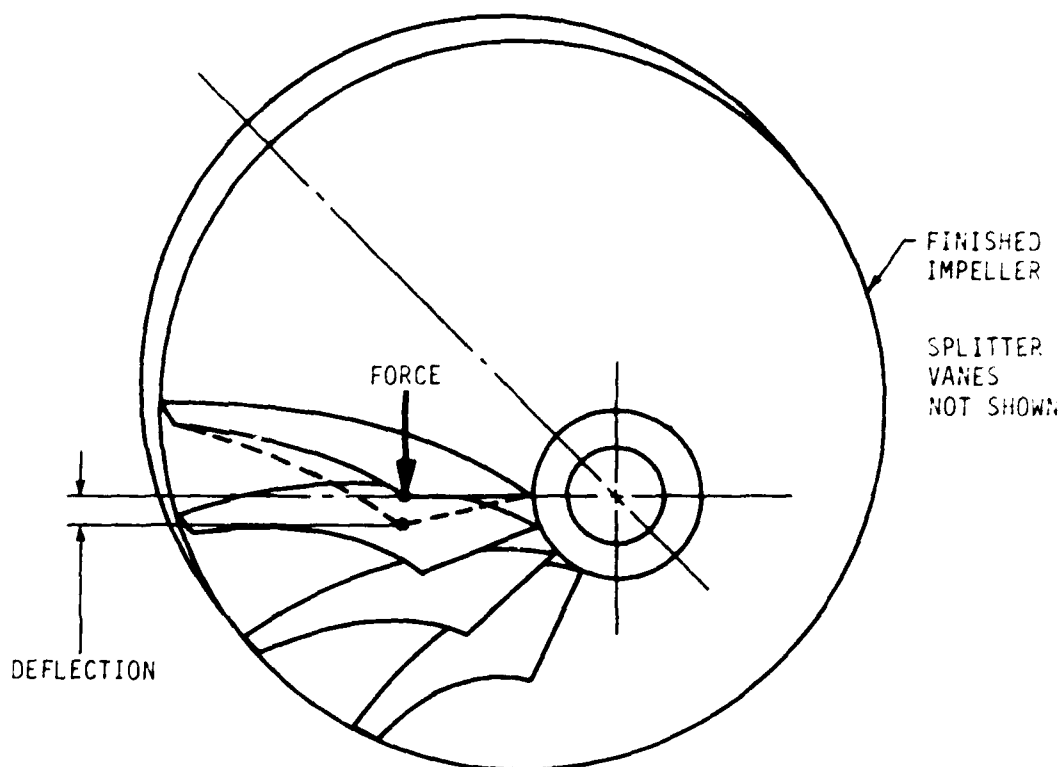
Strain Hardening Due to Impeller Finish Contour Milling.
